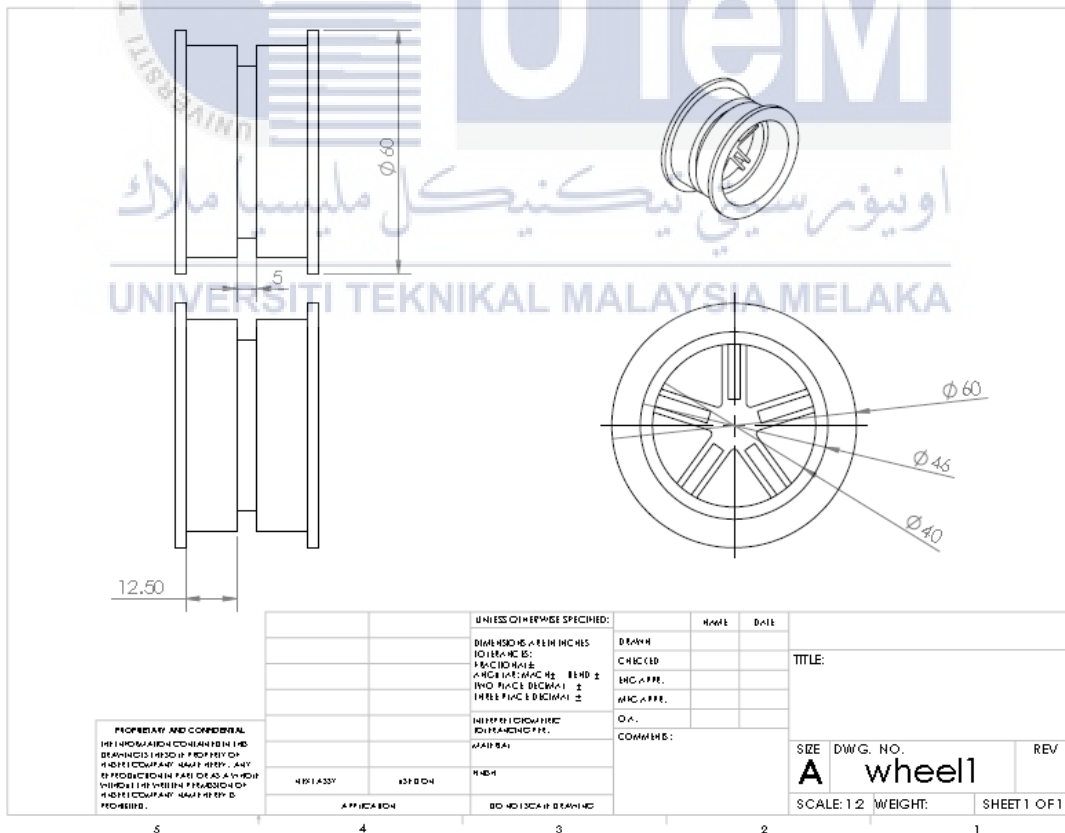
Plan CAD drawing for wheel of air duct robot
